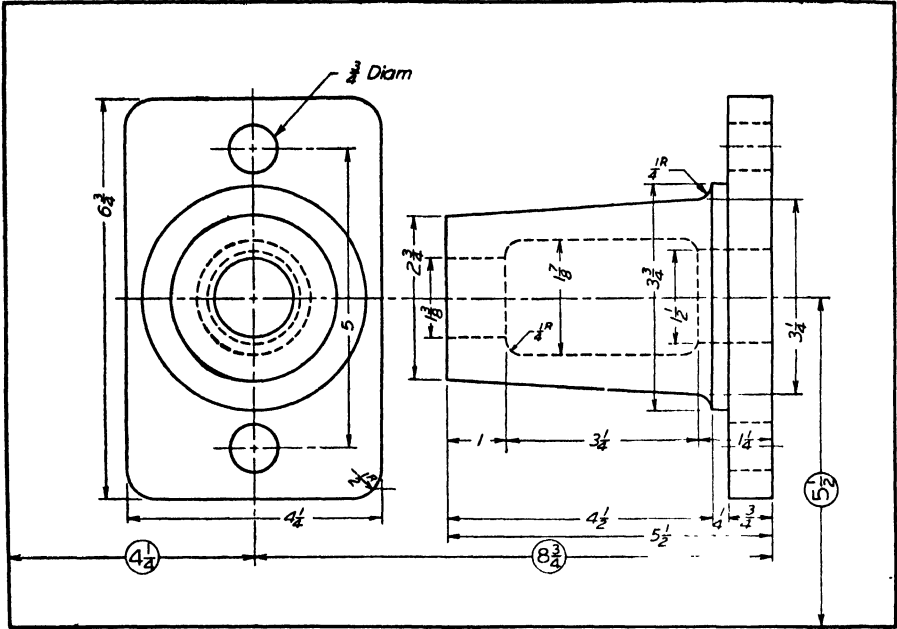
Prob. 147. Make a two-view drawing of the hood bearing, showing the right-hand view in section.
